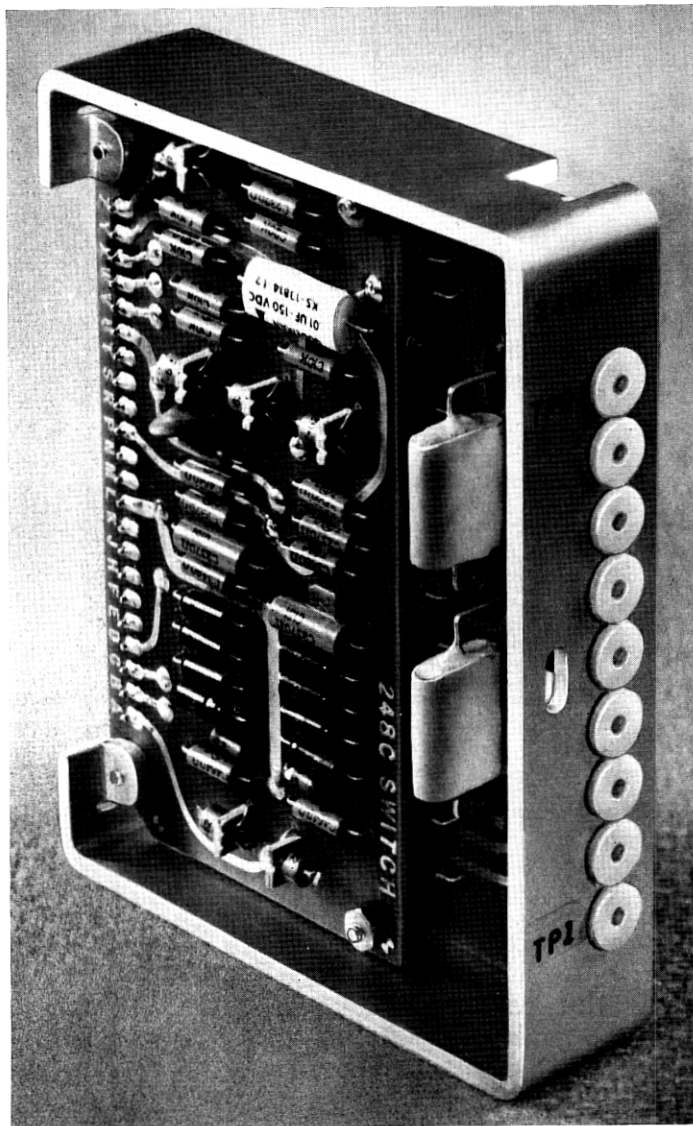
This unit contains two printed-wiring boards interconnected at the plug.
